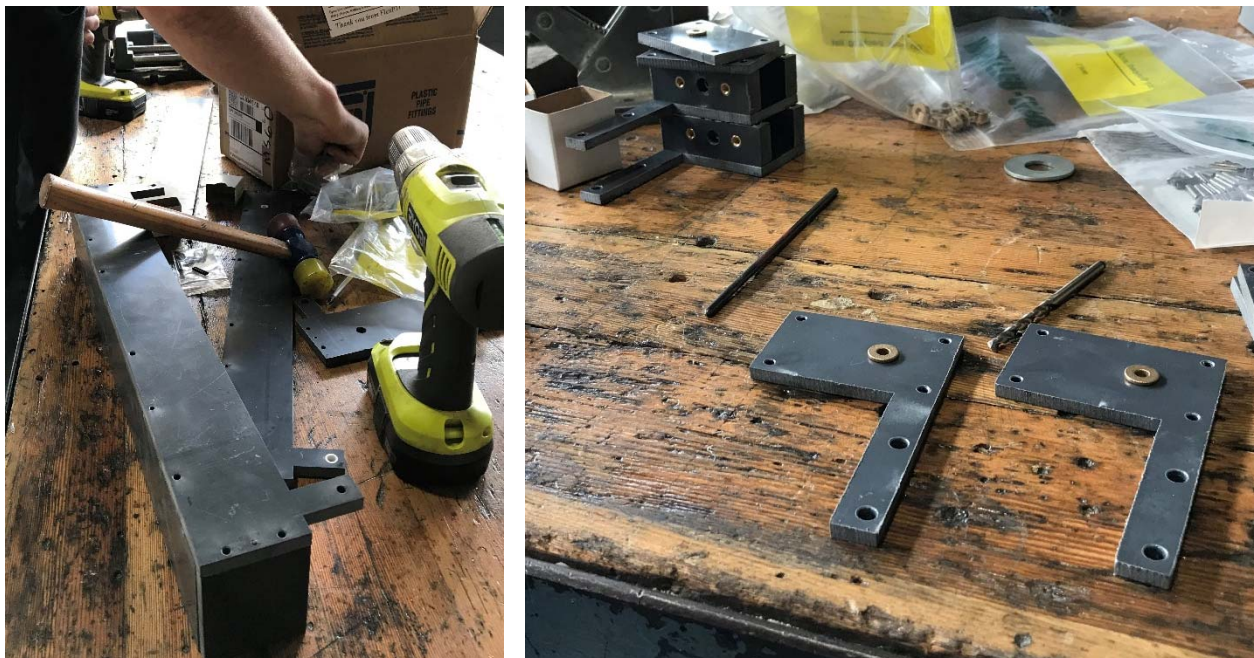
(left) One of the baths being assembled on a workbench. (right) Gear box components being prepared for assembly.
